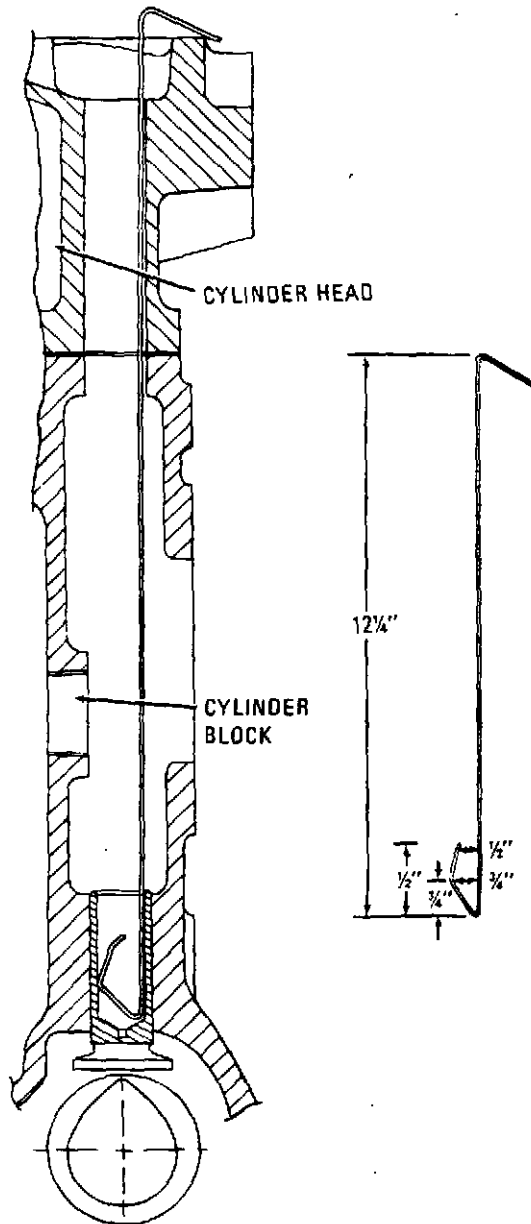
Valve Tappet Positioned for Camshaft Removal
